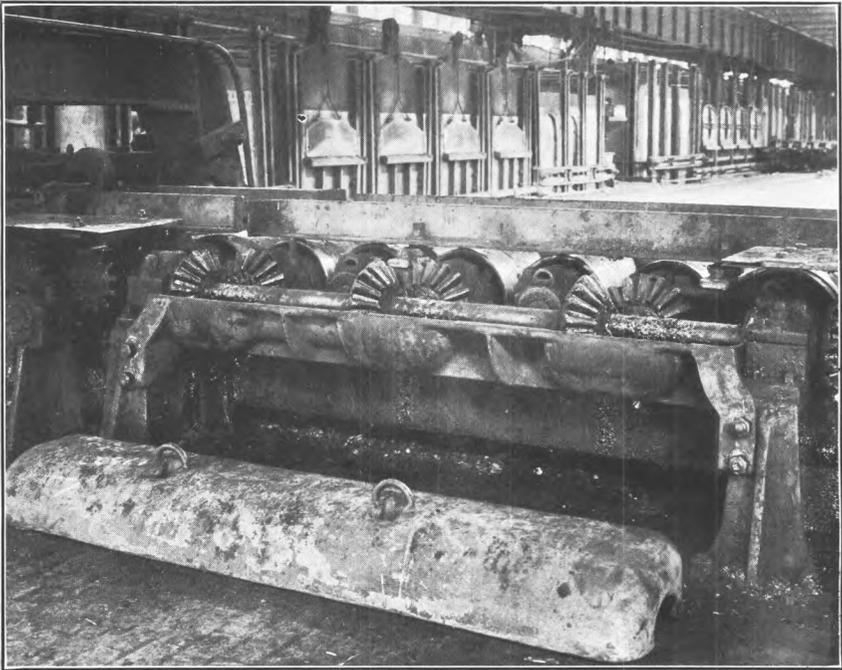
TRANSFER TABLE, WITH SHIELD FOR GEARS.
